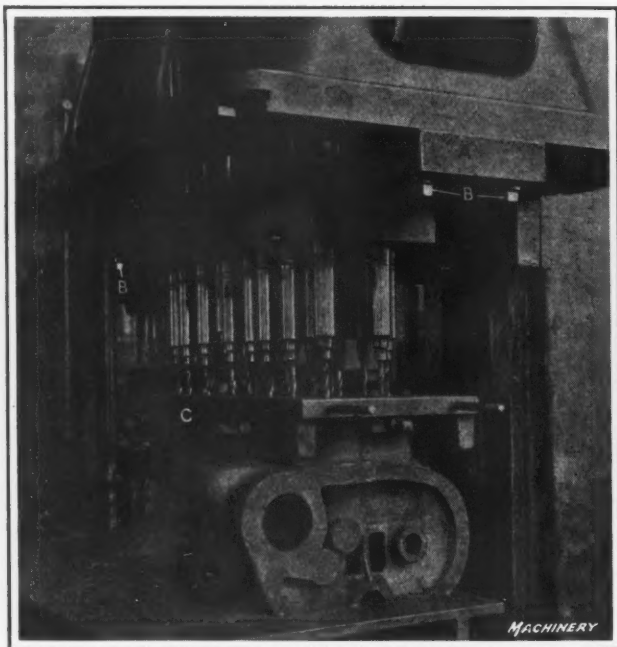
Special Head designed for Use on Multiple-spindle Drilling Machine
